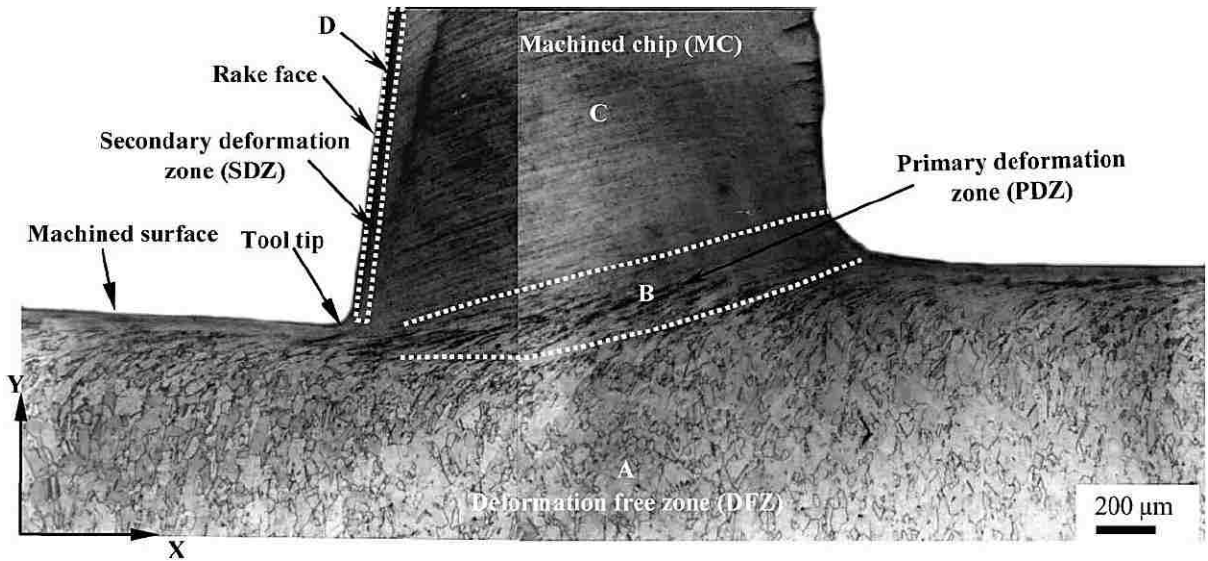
Cross sectional optical micrograph of Cu just ahead of the tool tip after orthogonal machining [18]
